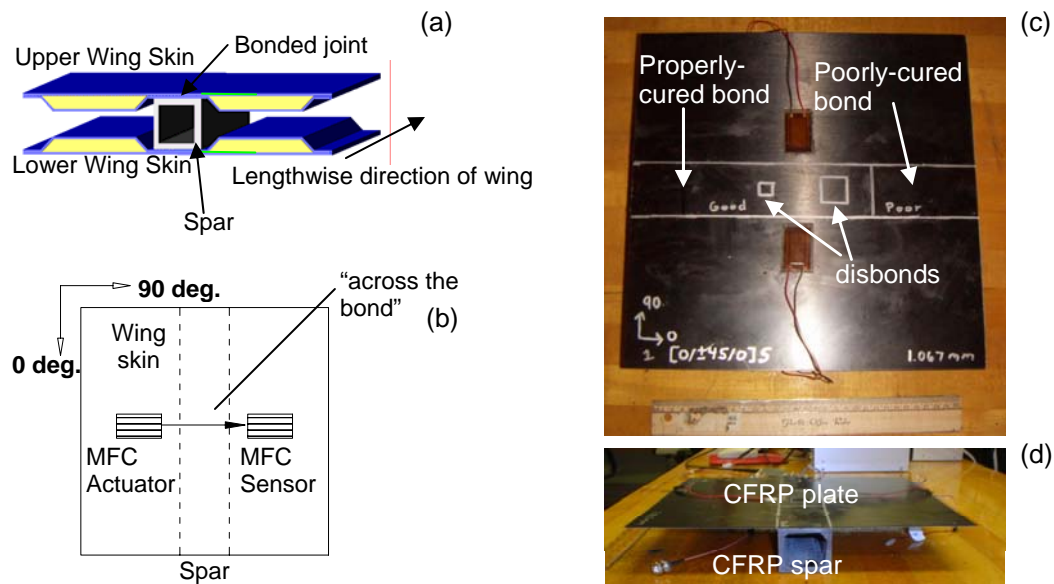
(a) UAV wing skin-to-spar assembly; (b) "across the bond" test configuration; (c) and (d) test specimens with attached MFC transducers and introduced simulated damage.
